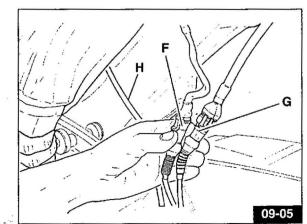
and the connector «G» Fig. 09-05 of the electric cock, then disconnect the exhaust pipe «H» - Fig. 09-05 and remove the tank;
